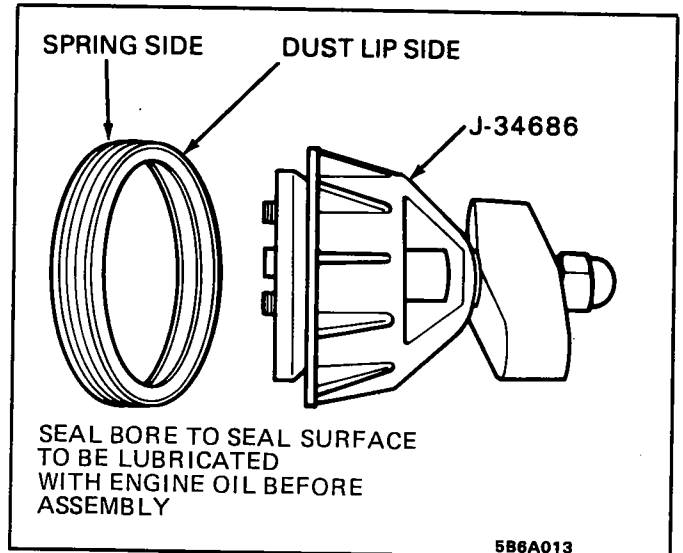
Installing Rear Main Bearing Oil Seal (typical)
